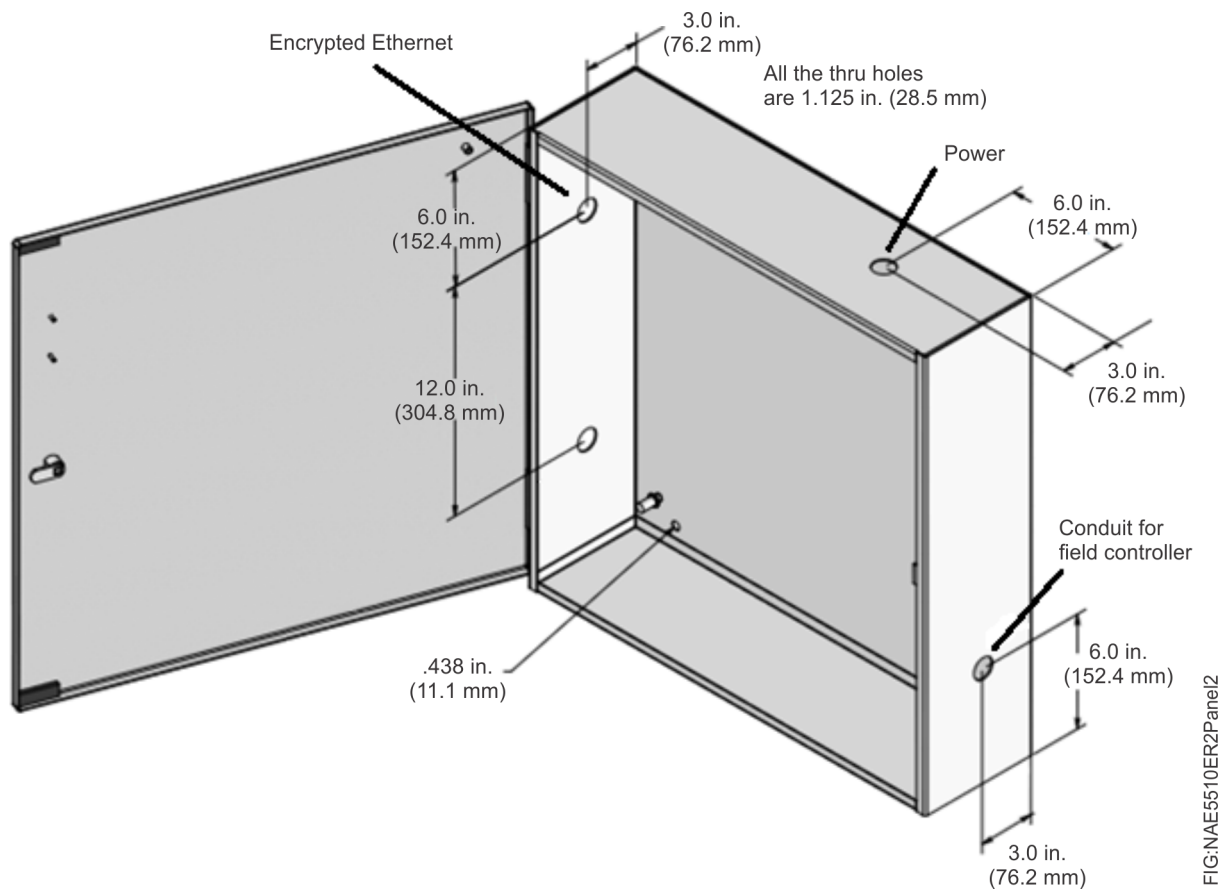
NAE5510-ER2 Panel Dimensions Showing Holes for External Connections, in. (mm)
